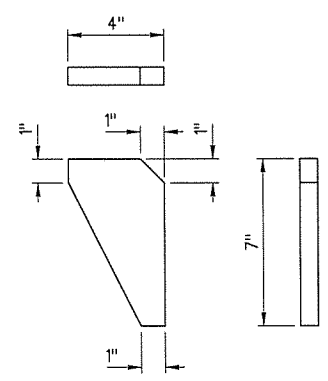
DETAIL OF SIGN SUPPORT CONNECTED TO TRUSS
